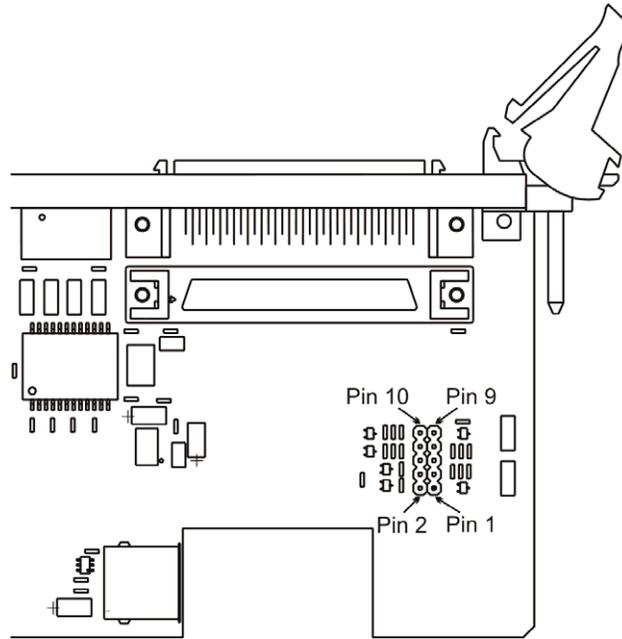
General Purpose I/O (LK1) Header (Rev B and Rev C boards)
